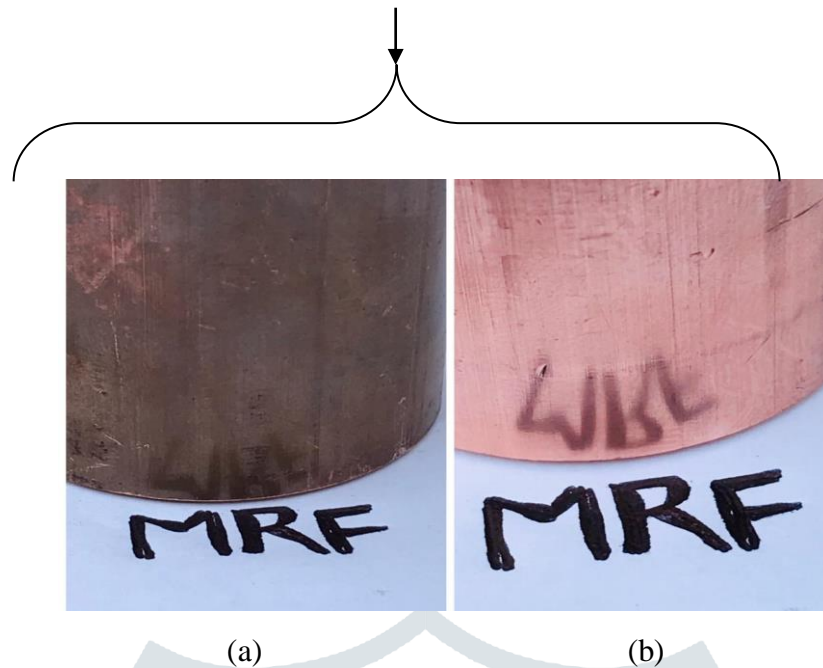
Actual photograph of copper cylindrical workpiece (a) before finishing and (b) after finishing.
